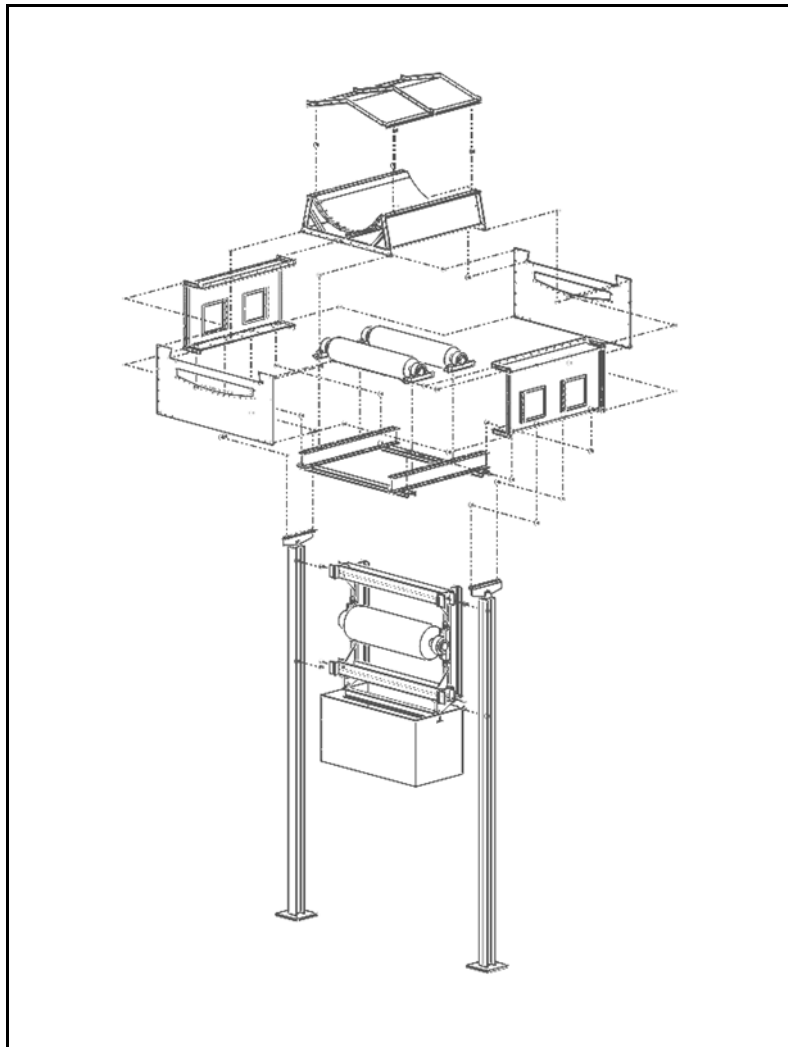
Exploded View of Typical Vertical Gravity Take-Up (Belt not shown for clarity)
